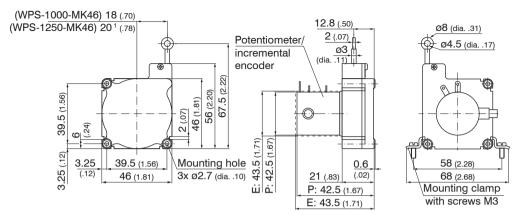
Dimensional drawing WPS- ... -MK46, with potentiometer or encoder, dimensions in mm (inches), not to scale
